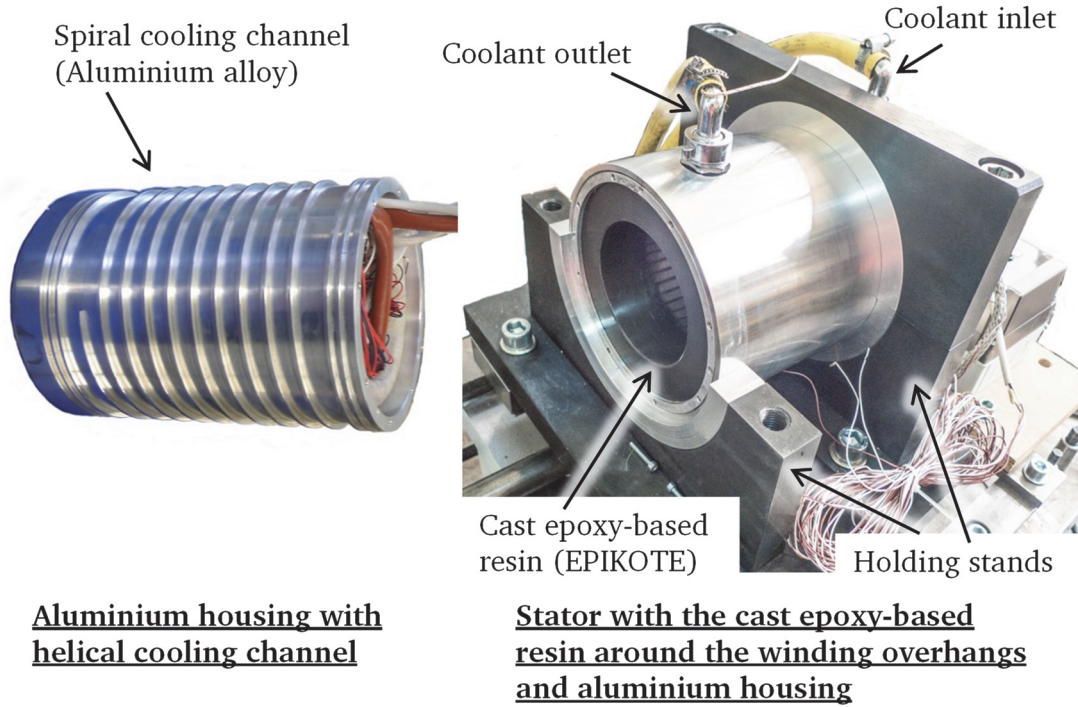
Left: Stator iron stack inside of the aluminium cooling jacket with helical cooling channel, Right: The cast epoxy-based resin around the stator winding overhangs within aluminium housing on the test bench
